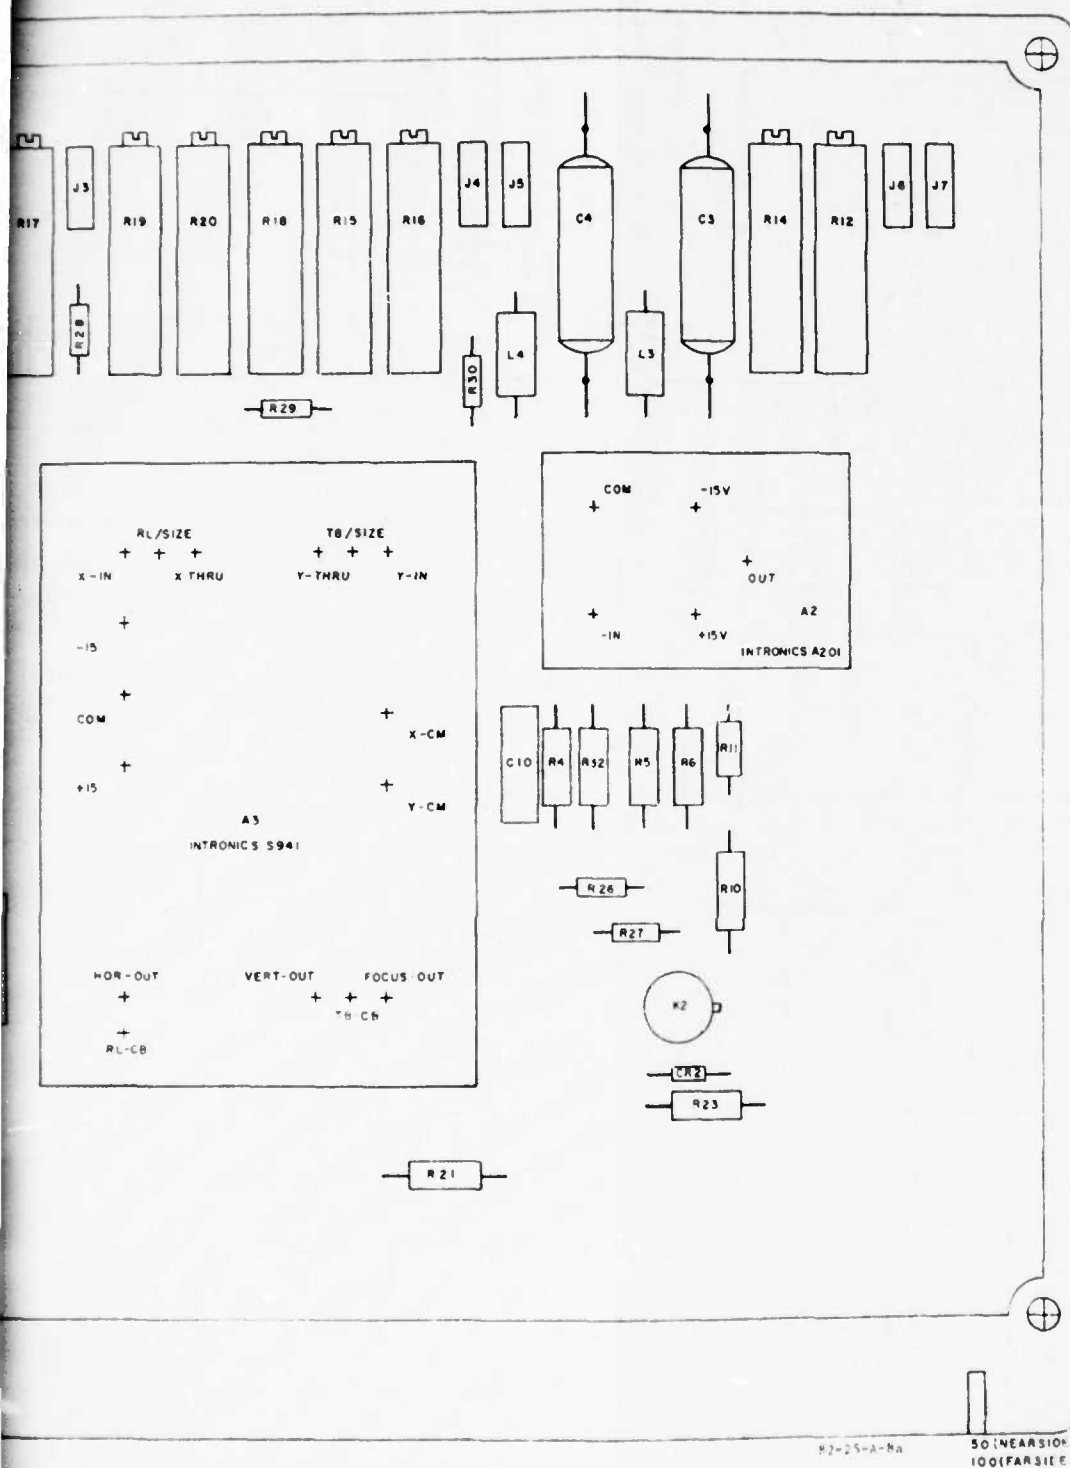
MODIFIED A5 PCB — SWITCH PVD (SHEET 1 OF 2)
